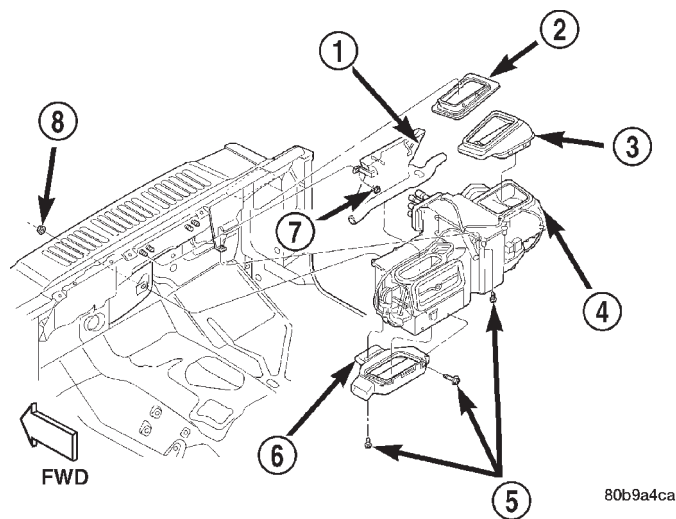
Heater-A/C Housing Ducts Remove/Install
